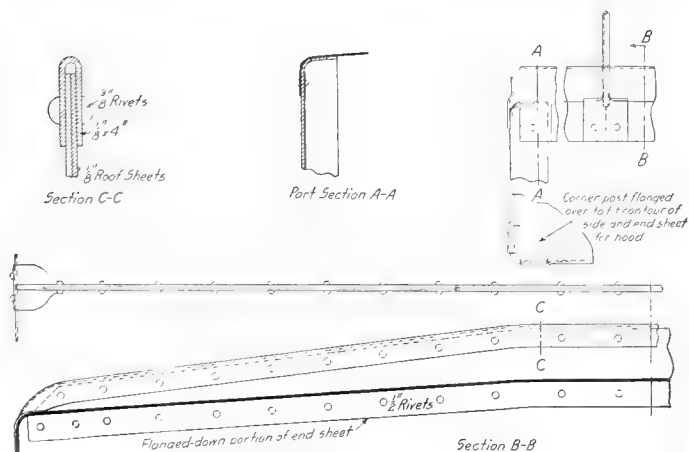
Details of Steel Roof for Summers All-Steel Box Car.
